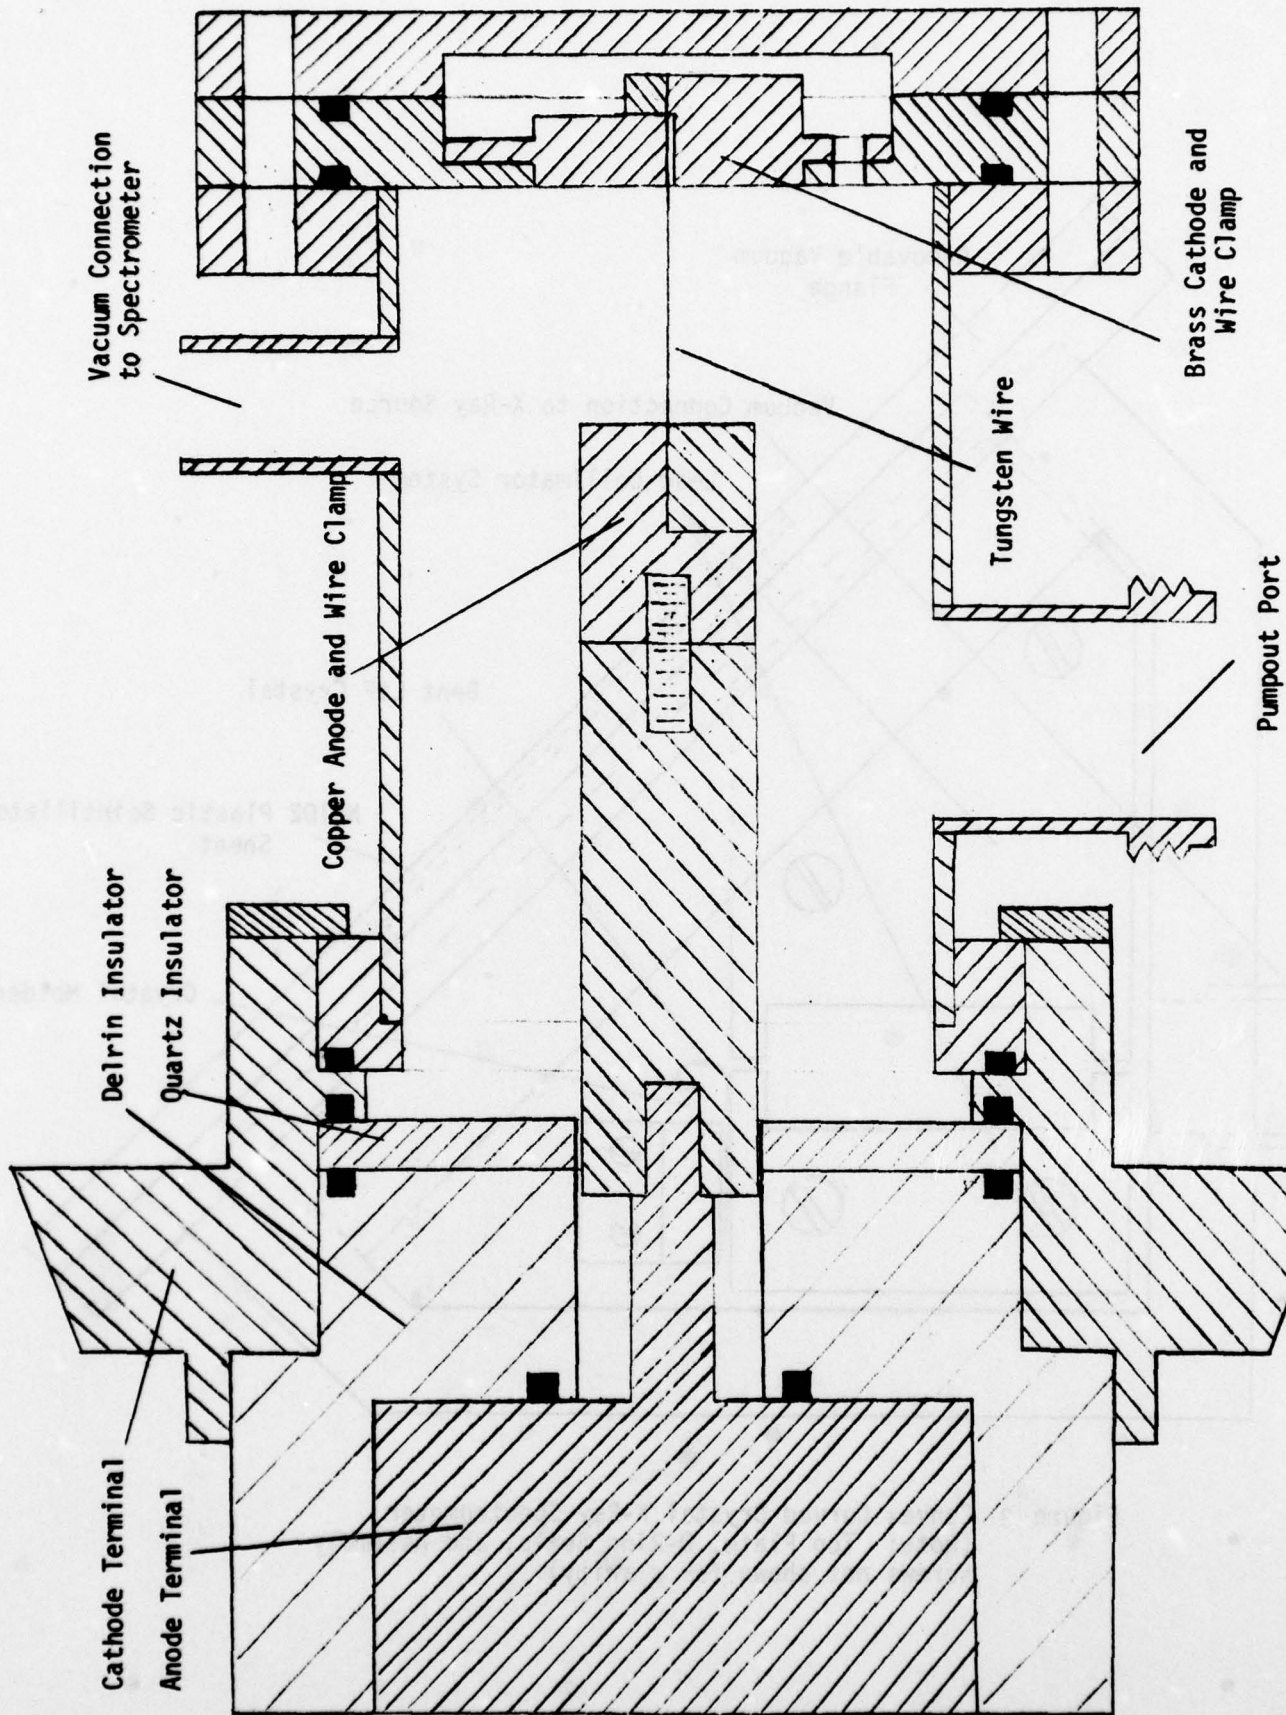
Exploding Wire X-Ray Source (NOTE: Assembly Screws not Shown for Clarity).
